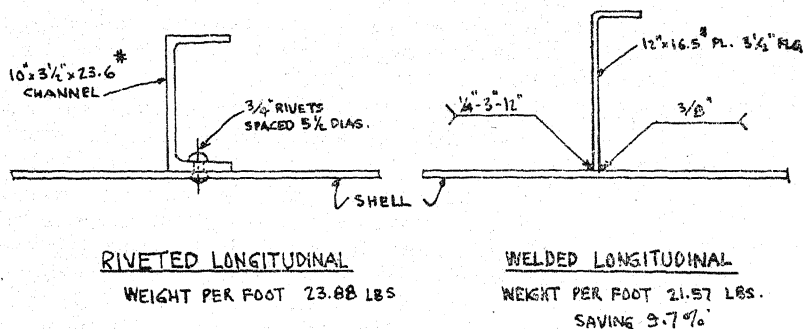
Comparative weight—riveted and welded shell longitudinals.
